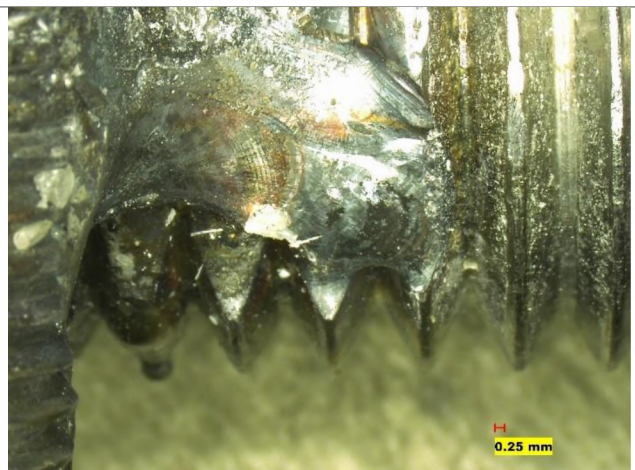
Welded section showing melted regions due to excessive heat input
